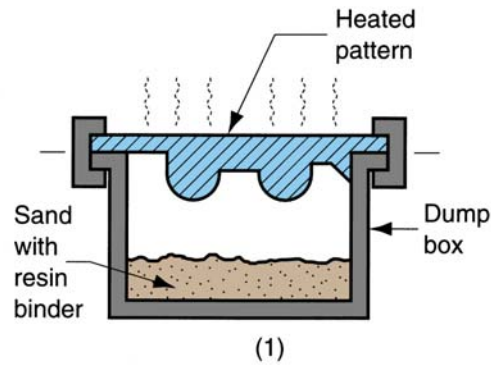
Steps in shell-molding: (1) a match-plate or cope-and-drag metal pattern is heated and placed over a box containing sand mixed with thermosetting resin.
